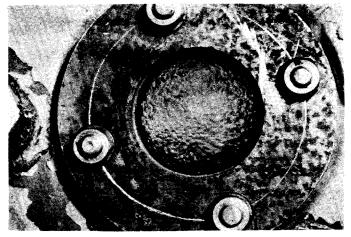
Visible Ports and Exhause Manifold of a 150-hp Gas Engine
